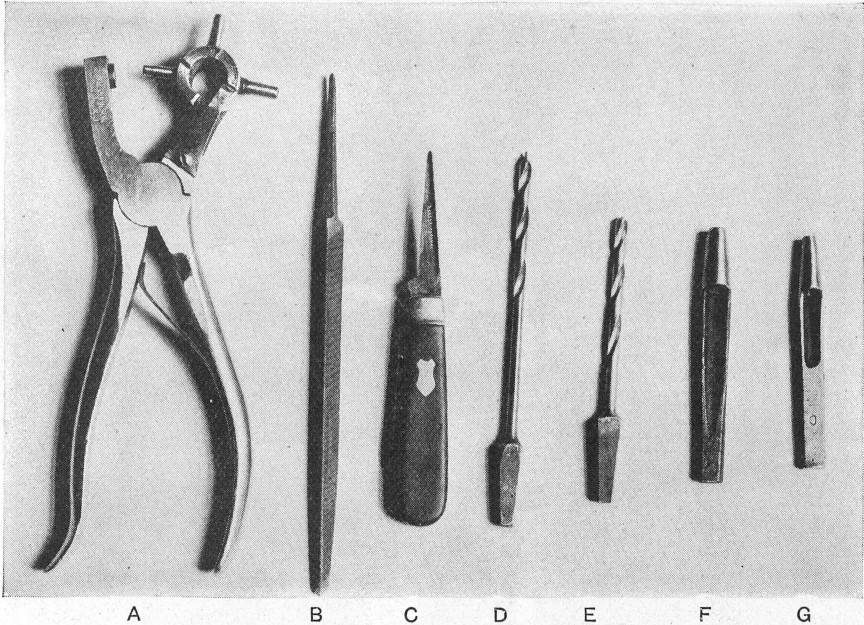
TOOLS FOR MAKING HOLES THRU LEATHER
